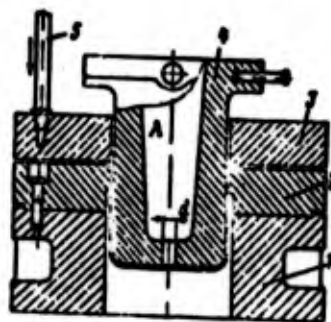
Design of a draw stamp. 1 - support; 2 - die; 3 - clamp; 4 - punch; 5 - clamp rod.
